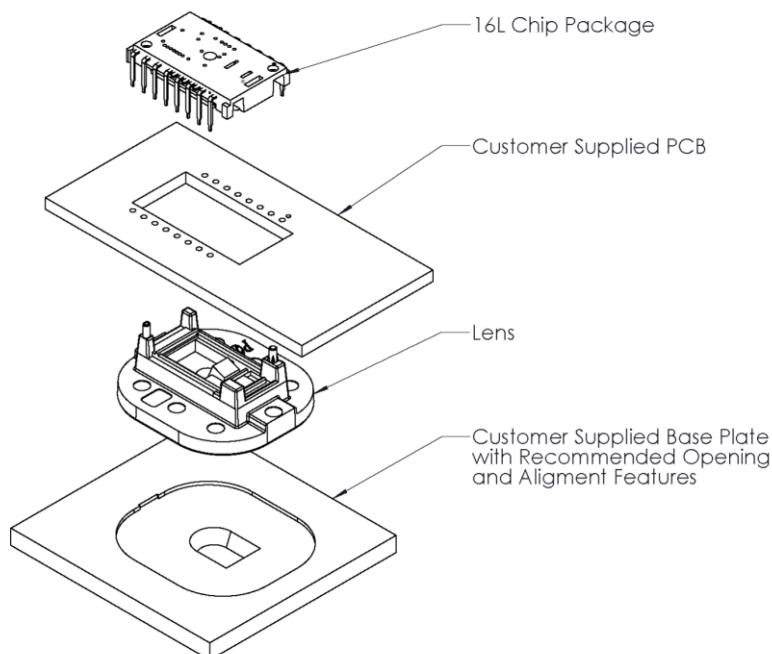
Exploded View of Assembly with LM19-LSI Lens
